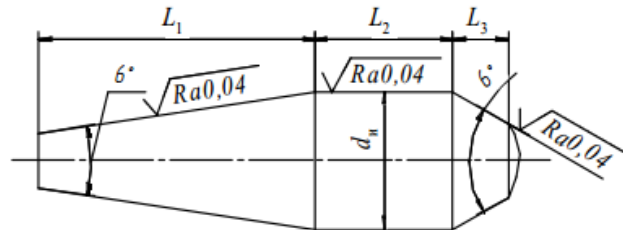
Carbide-tipped burnishing tool for the treating of deep holes of small diameter.
